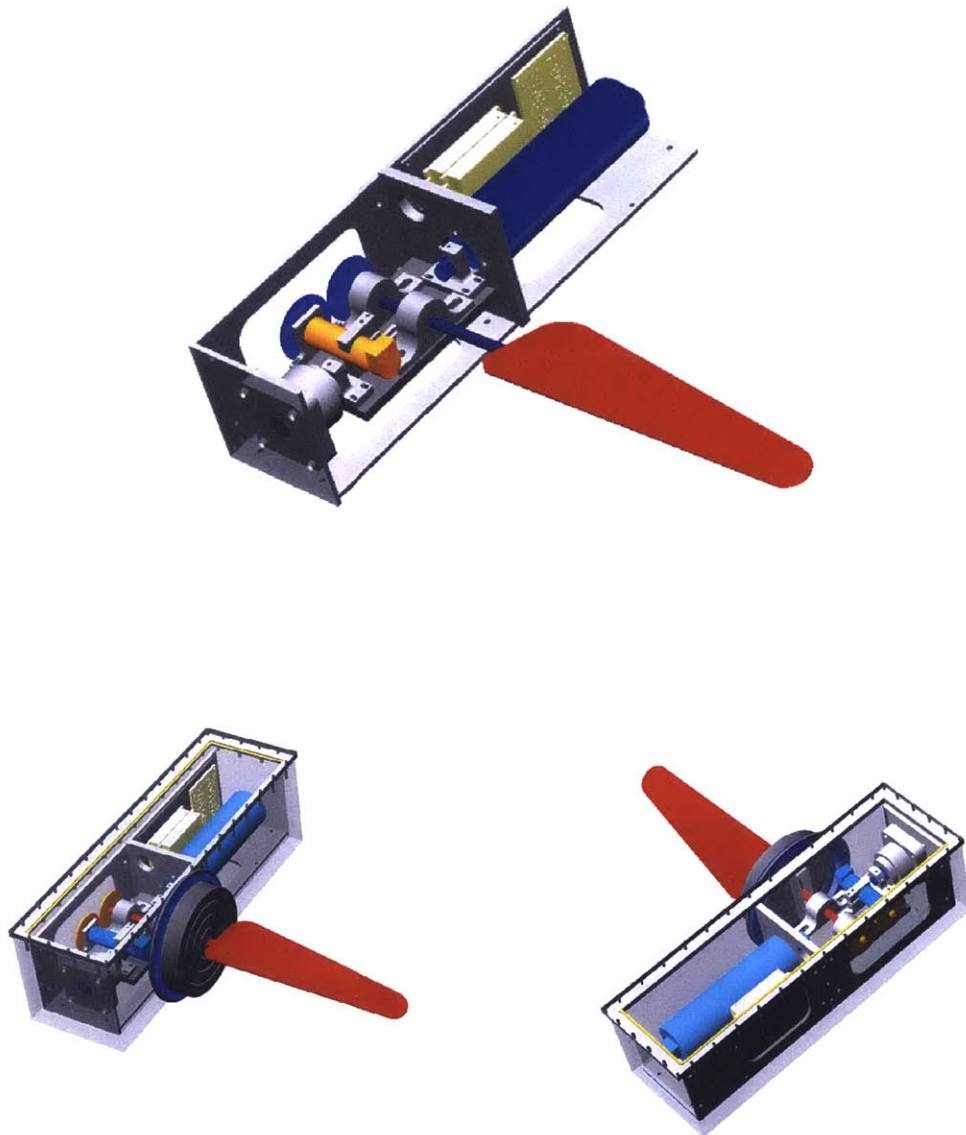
Drawings of single housing foil actuator. The center line of the roll axis crosses the center line of the pitch axis. There are radial ball bearings in the pillow blocks that constrain the shaft attached to the foil. There are set screws on the inner collar of the radial ball bearings that constrain the shaft in the axial direction. The large bearing attached to the vertical plate at the far end is a double roller taper bearing. This bearing can take large radial and axial forces, and large moments about the pitch and yaw axes. This design is highly over constrained, which allows no motion on axes other than pitch and roll. The range of motion on the pitch axis is 360 degrees. The total range of motion on the roll axis is 26 degrees due to the stiffness of the bellows. The limited range of motion on the roll axis and the poor robustness of the bellows were the major problems with this design.
